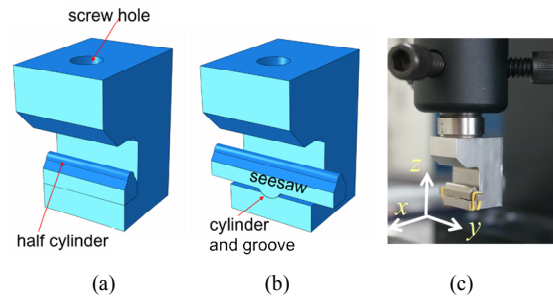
Designs of jig for SCB test method: (a) Fixed jig; (b) rotatable jig; (c) photograph of rotatable jig.
